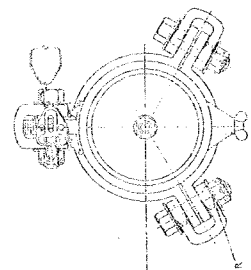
SECTIONAL VIEW OF BARREL WITH ATTACHMENTS
